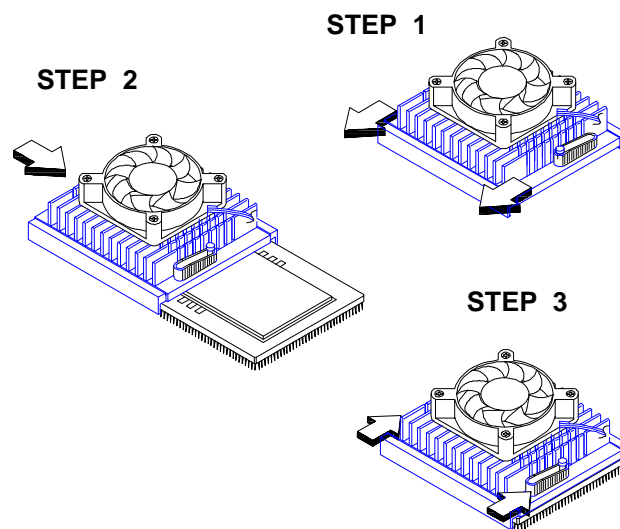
Attaching the Sliding Heat Sink to the CPU
